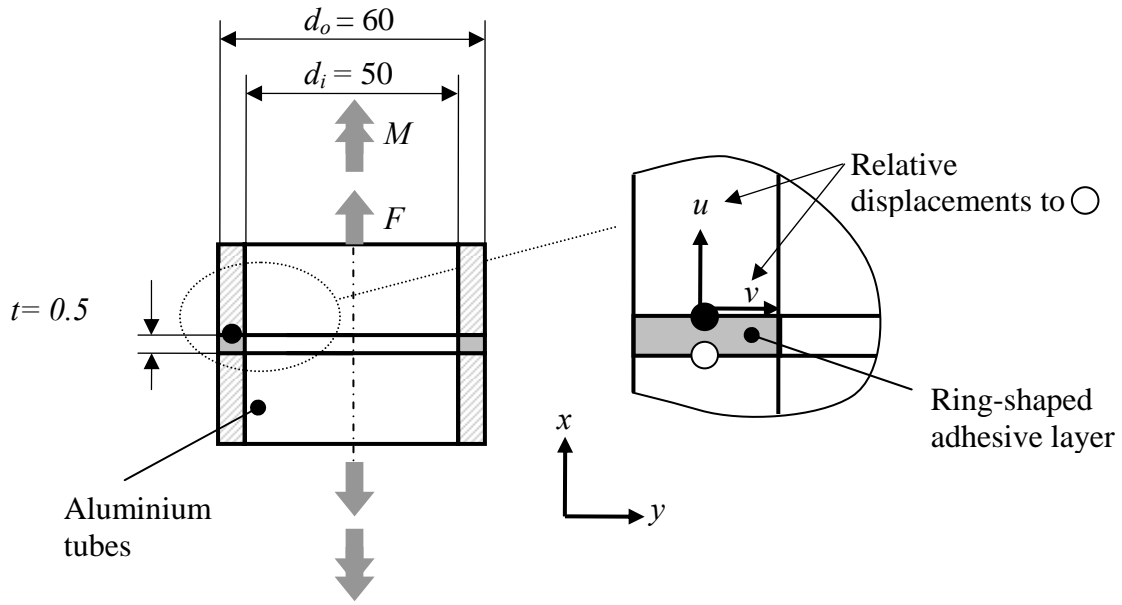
Combined tension/torsion device for quasi-static testing of thin adhesive layers (dimensions in mm).
